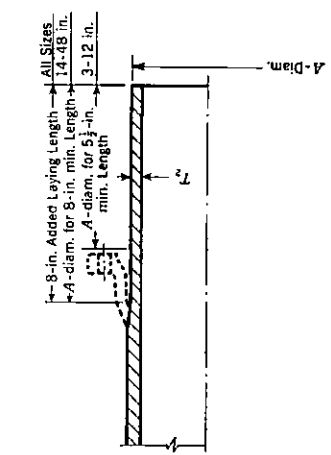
Standard Mechanical-Joint Dimensions (See Table 10.1)
